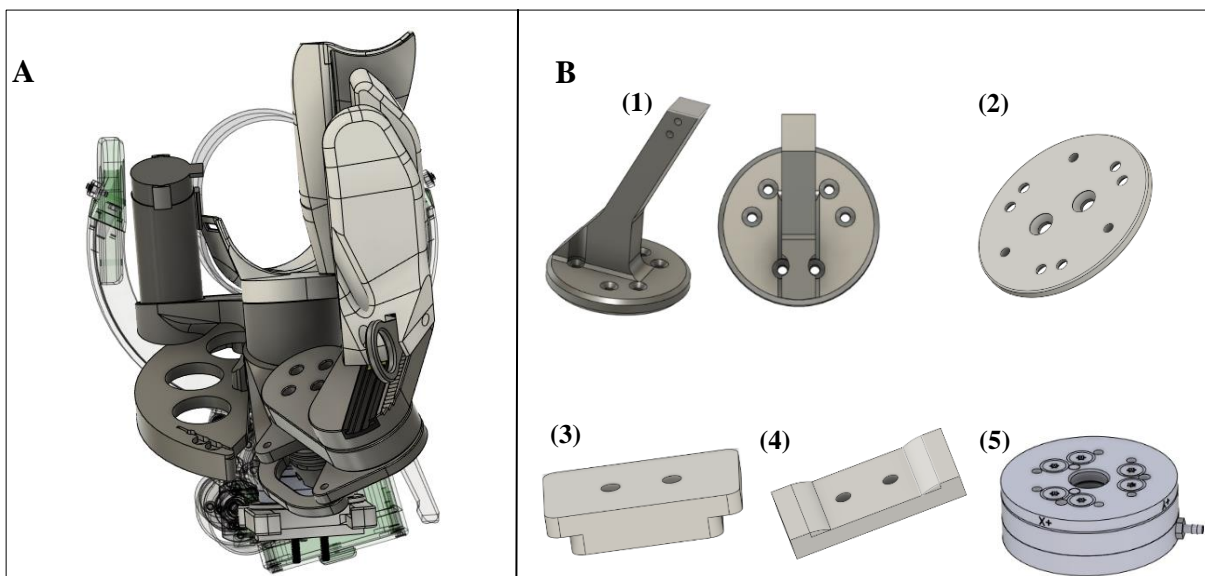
(A) PRIDE hand module attached to the ARMin exoskeleton and (B) parts to make that attachment possible: (1) top part that makes the connection between the hand module and the force/torque sensor; (3) part that connects to the force/torque sensor from below and to ARMin's extremity; (4)-(5) parts that slide across the extremity, making it possible to adjust the distance from the forearm to the fingertips; (5) FTD-Mini-45 SI-580-20 force/torque sensor.
